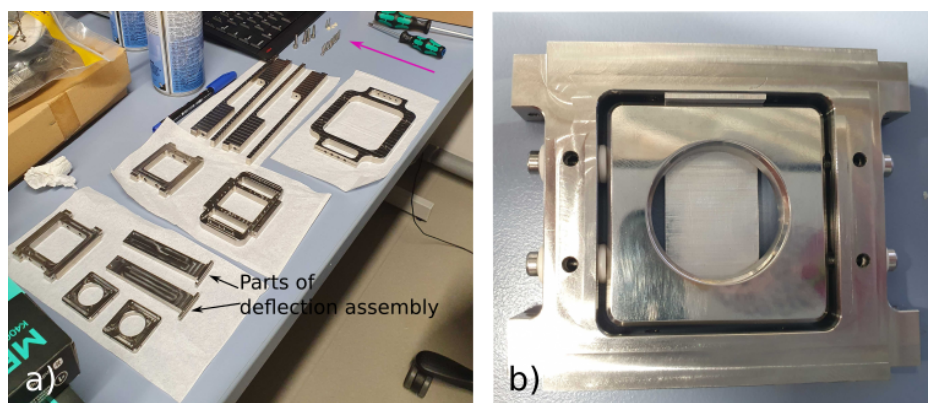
The unmounted inner assembly. In a) the entire unmounted inner assembly is shown. Also, two parts of the ion deflection assembly are there, labelled with a black arrow. The purple arrow indicates the required screws and ceramic holders. In b) the alignment of the electrode is shown. With an aluminium L-shape tool, the alignment in the horizontal plane is done. On the left side, the ceramic holders are missing to avoid mechanical stress on the ceramic holders. To the polished side of the electrode lays above.
